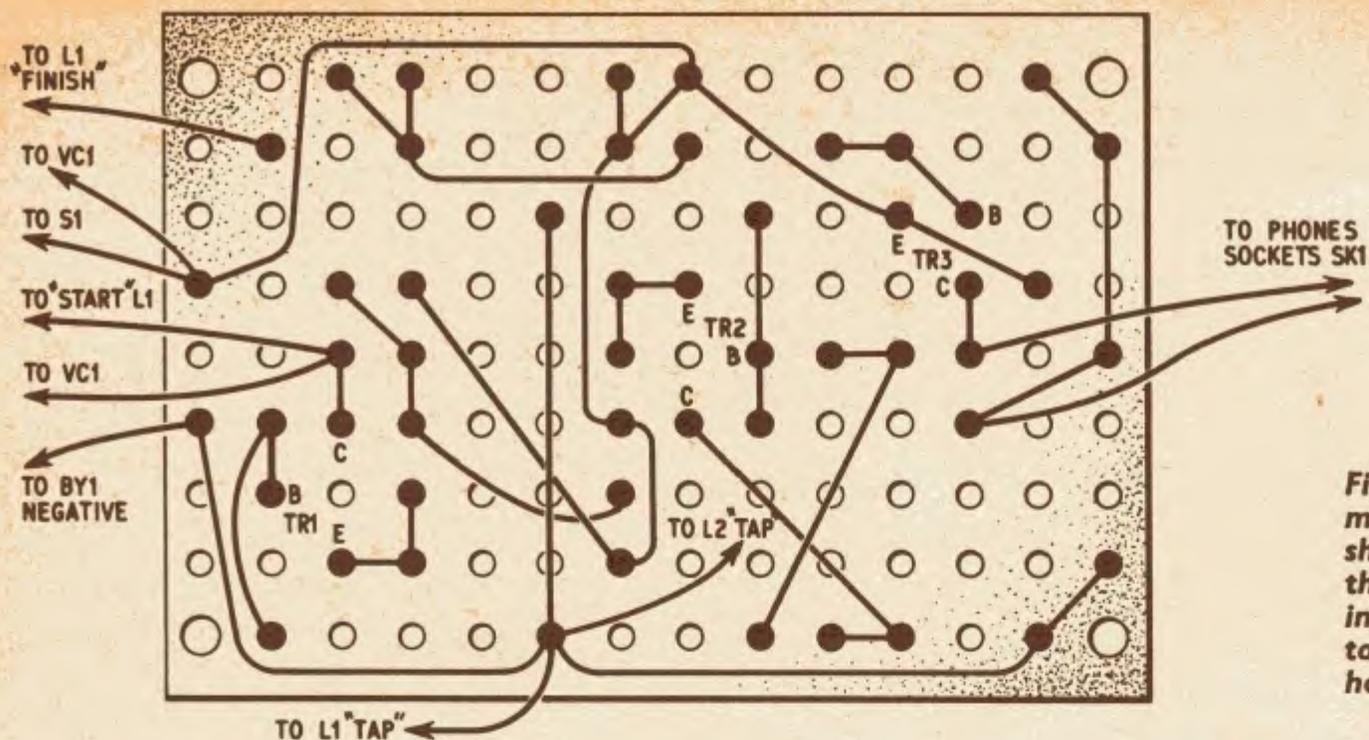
Underside view of the main component assembly board showing the exact positions of the eyelet tags and interconnecting wires. The wire to "L2 tap" is passed through a vacant hole to the coil winding
